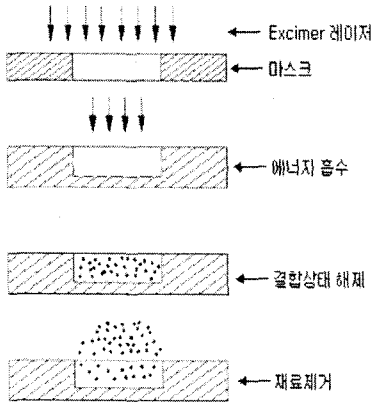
Schematic illustration of microhole machining mechanism using excimer laser⁴⁾
